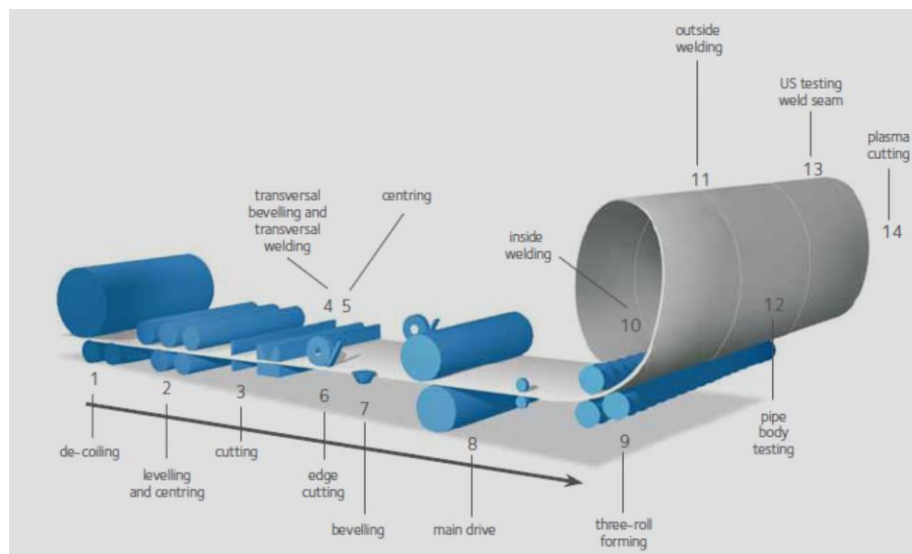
Schematic representation of the manufacturing process of spirally welded tubes.
